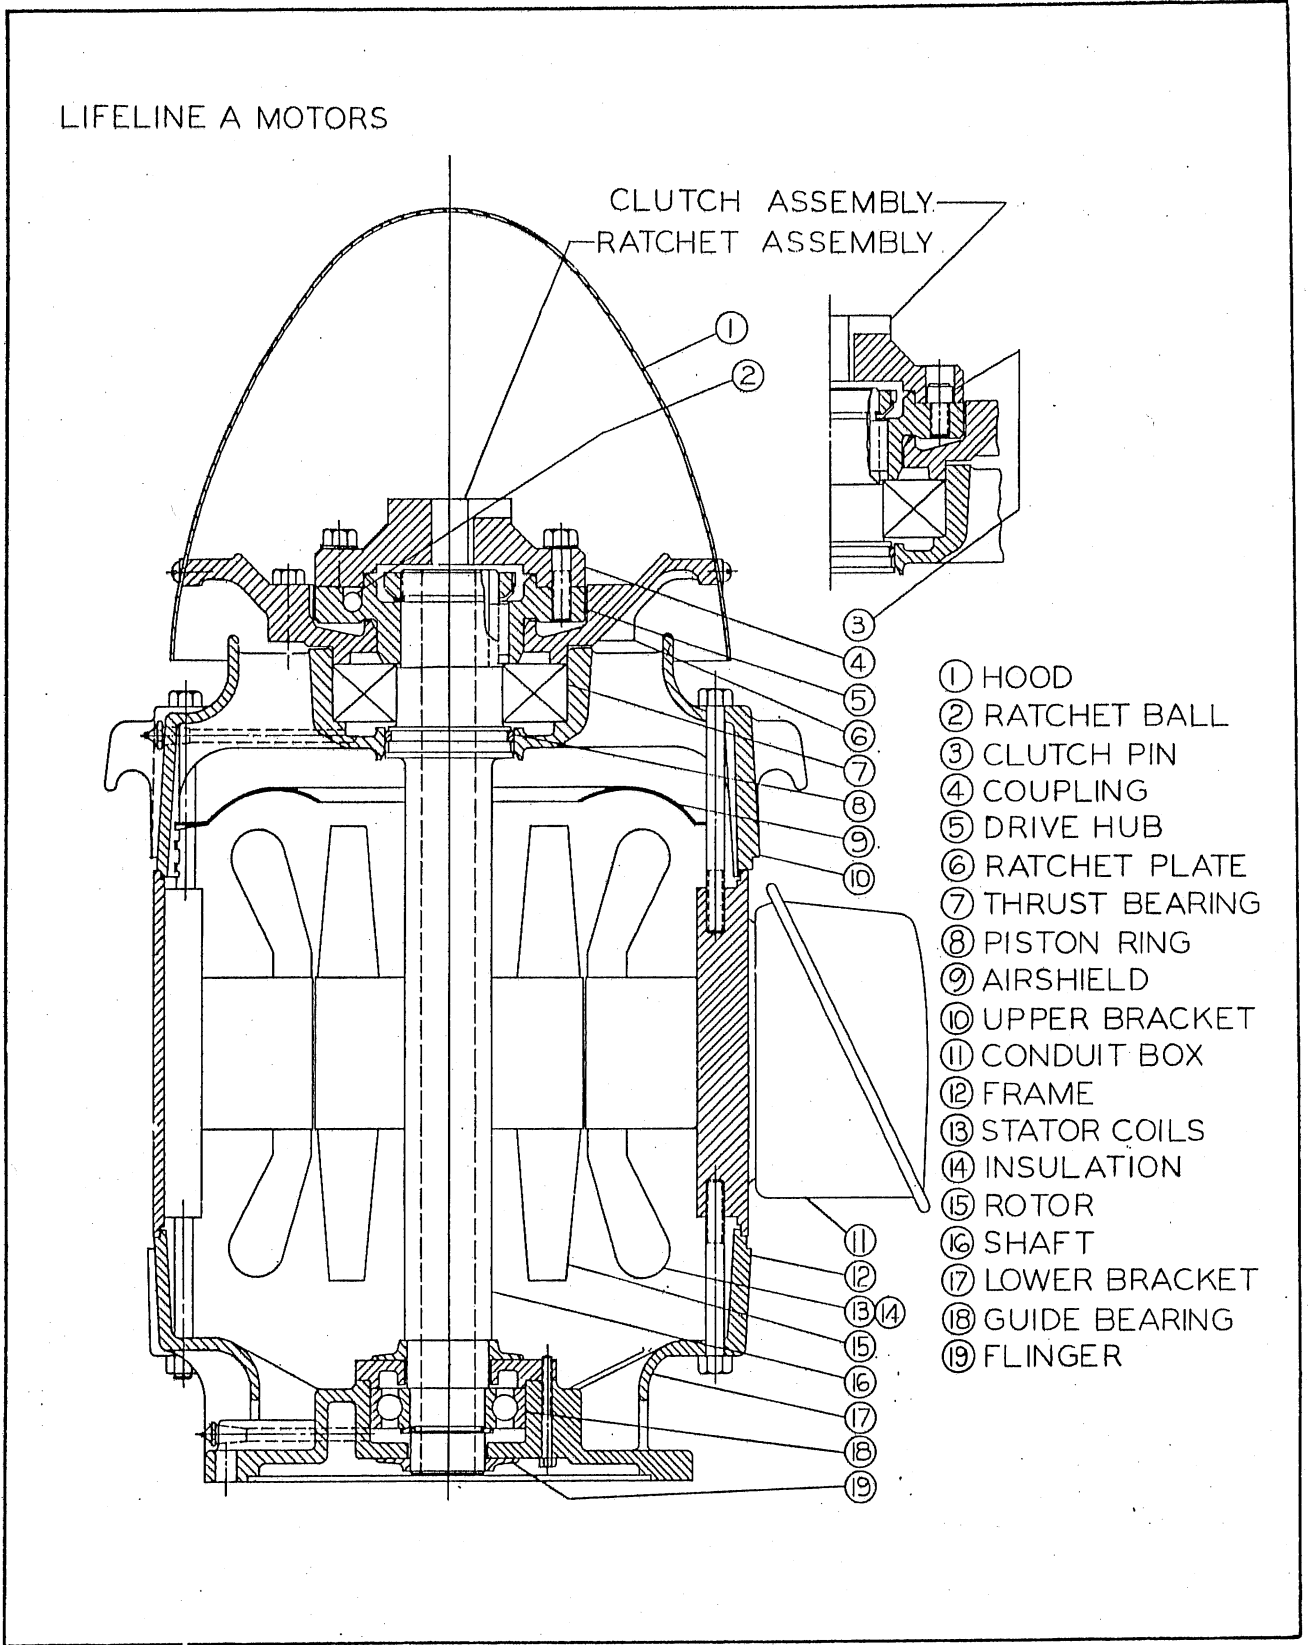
Arrangement of Parts, Vertical Hollow Shaft Type A Life-Line Motor, Frames 213-286-U (Solid Shaft Motors Use Same Construction Except Top Coupling is omitted)
